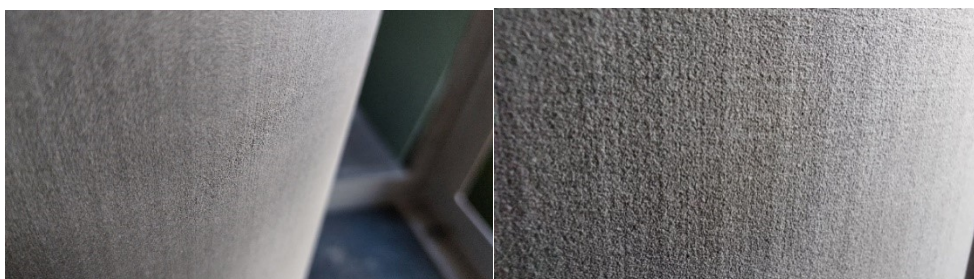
View of the surface of the model produced in the HP MultiJet Fusion technology
